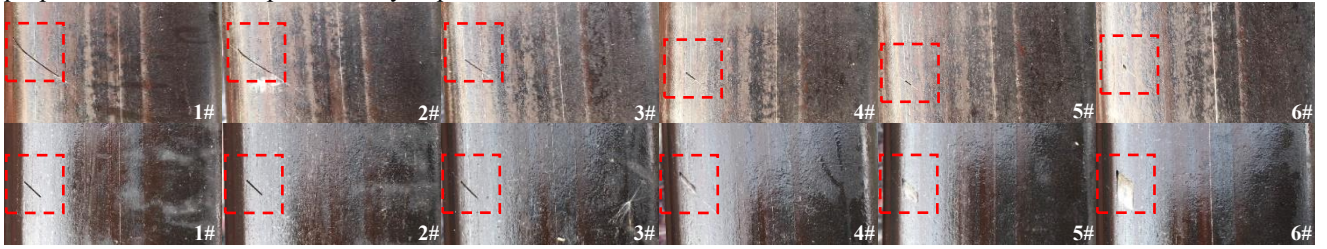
On-site photos of the cracks (Rows 1-2 correspond to groups I and V, respectively).
